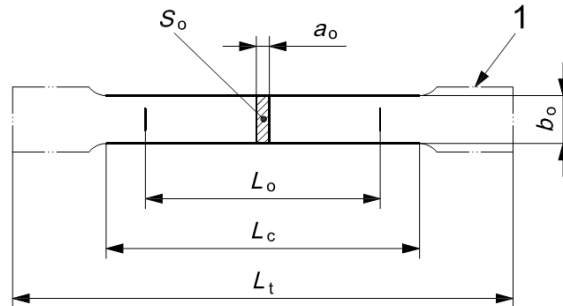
Machined test piece of rectangular cross-section [96].
